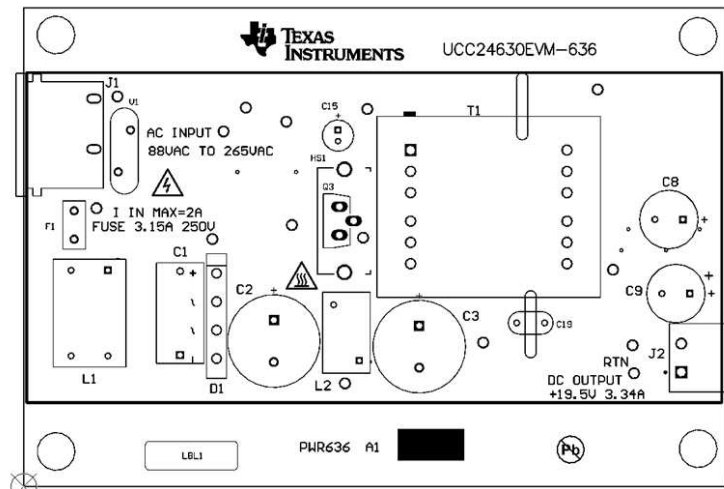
UCC24630EVM-636 Top Layer Assembly Drawing
